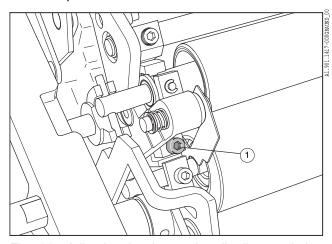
Adjusting the dampening distributor relative to the plate dampening roller
